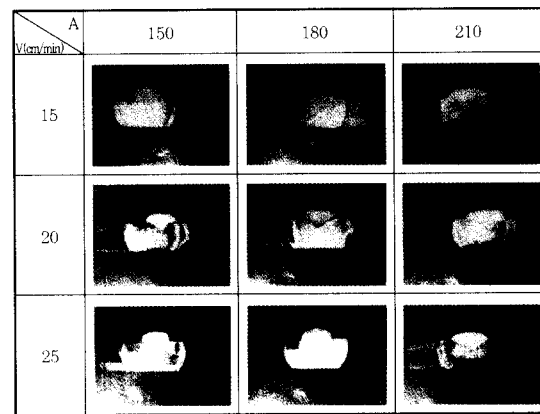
General appearance of WC-12%Co powders free overlay weld alloy cross sections.
